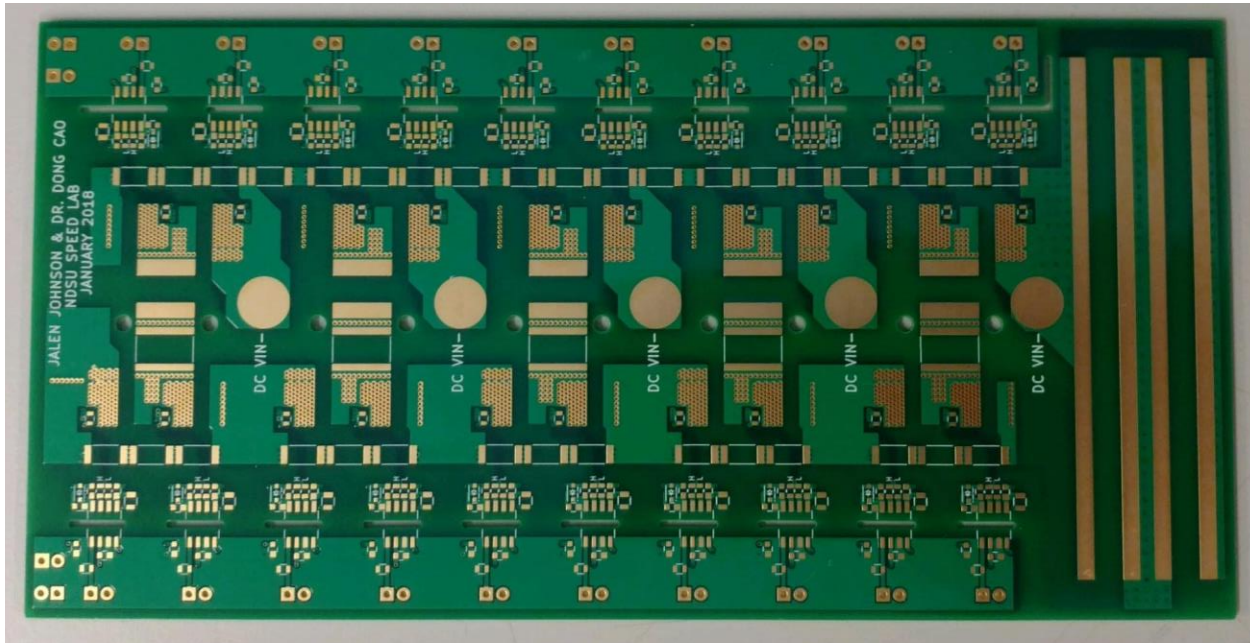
RMMC DCX PCB Bottom Side Bare Board
